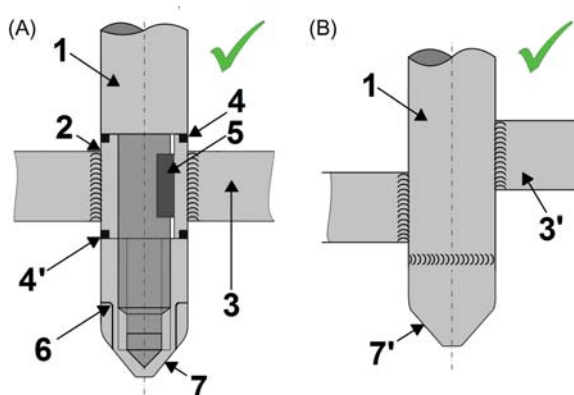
The hub (2) with blades (3) is secured to the shaft (1). All voids should be closed by either fabrication (welding) or approved sealing techniques (O-rings, seals, etc.) to give surfaces ground flush and free of crevices at points of metal-to-metal contact. (A) Food quality gaskets under controlled compression respectively may seal the propeller hub to the shaft (4) and end cap (4'). Keyways (5), where employed due to mechanical design considerations, shall have edge radii not less than 3 mm. The corners of the spanner flats (6) on the end cap have been radiused. (B) An all-welded impeller assembly (e.g., hub, blades, end cap) is still preferred. Impeller hubs welded to the shaft are preferred over removable hubs. Although the designer may omit the hub, and immediately can attach the blades to the shaft by welding (3'). Finally, also the end cap (7') can be welded to the shaft ([Hauser et al., 2004b](#); [Moerman and Kastelein, 2014](#)).
